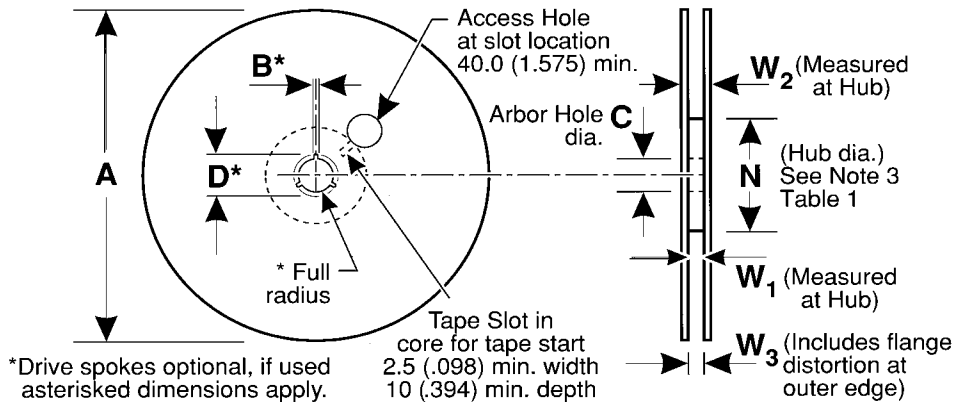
Reel Dimensions (Metric Dimensions will govern)
